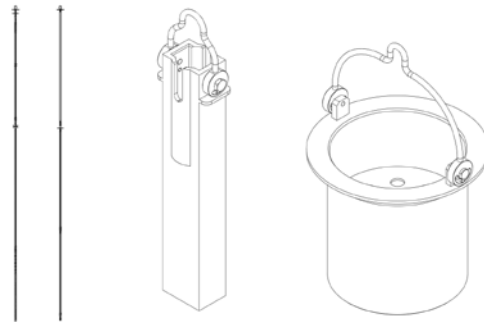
Target holder handling tool, target handling tool, fresh target basket, and target transfer basket (from left to right)
